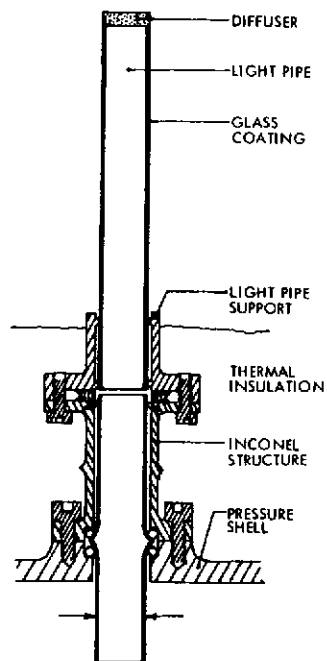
A-22. Extended Viewing Port with Diffuser and Coated Light Pipe
